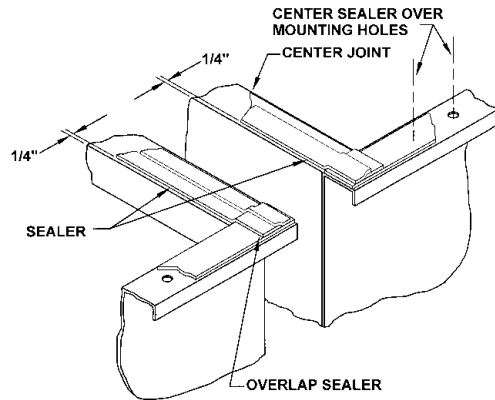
Sealer Detail for Center Joint of Units with two or more Top Sections.
